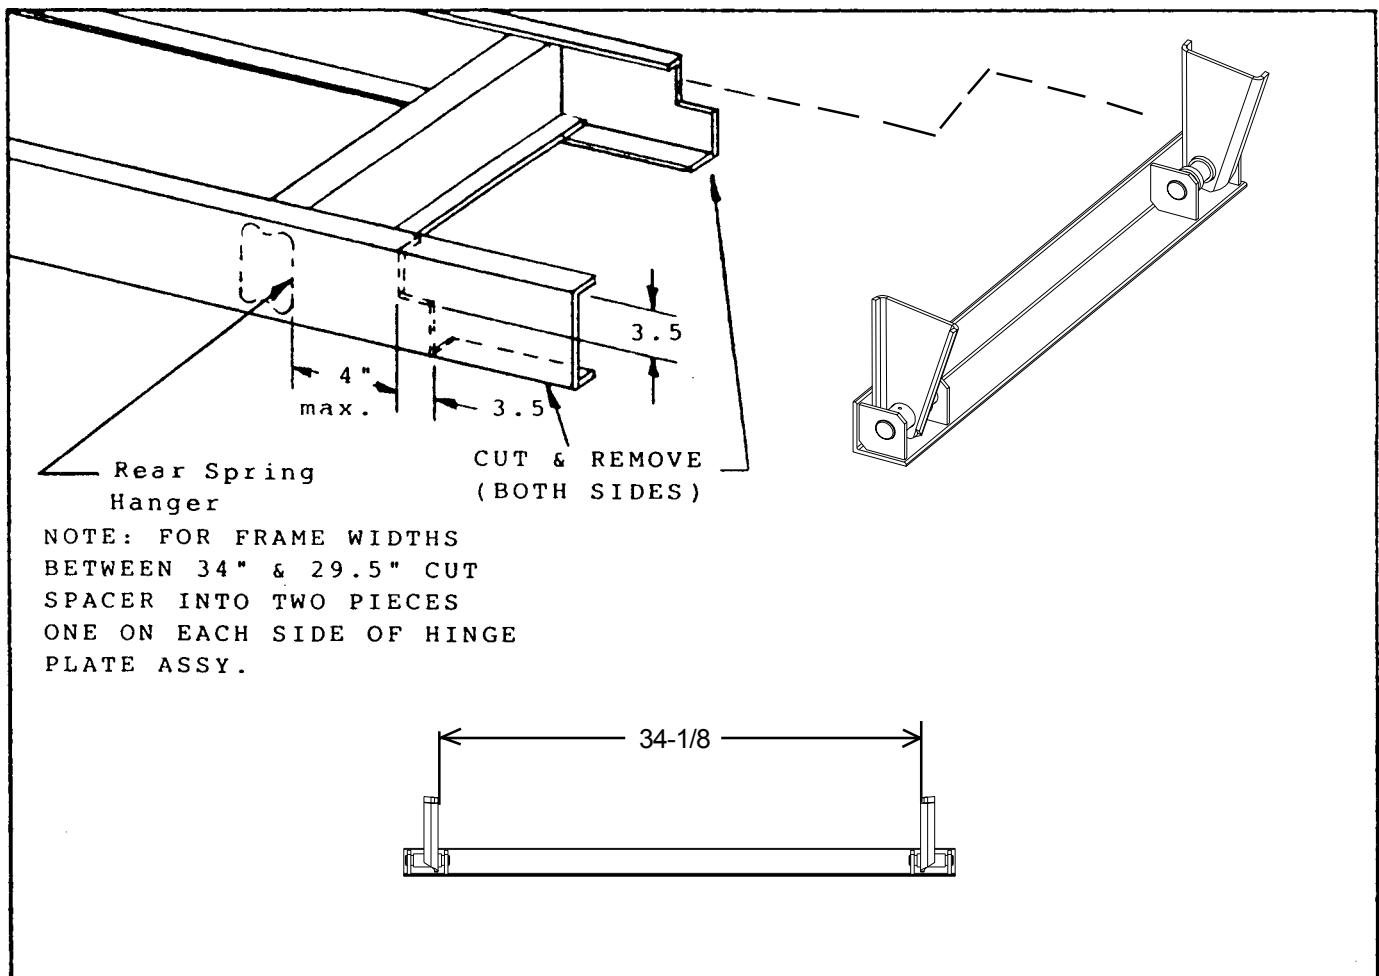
FRAME MODIFICATION AND REAR HINGE ATTACHMENT
